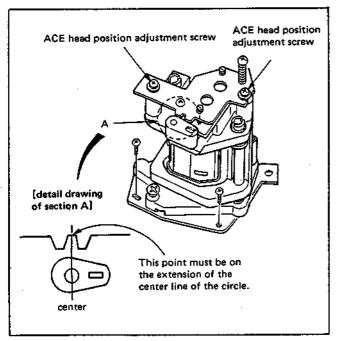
Position Adjustment of ACE Assembly (2)
